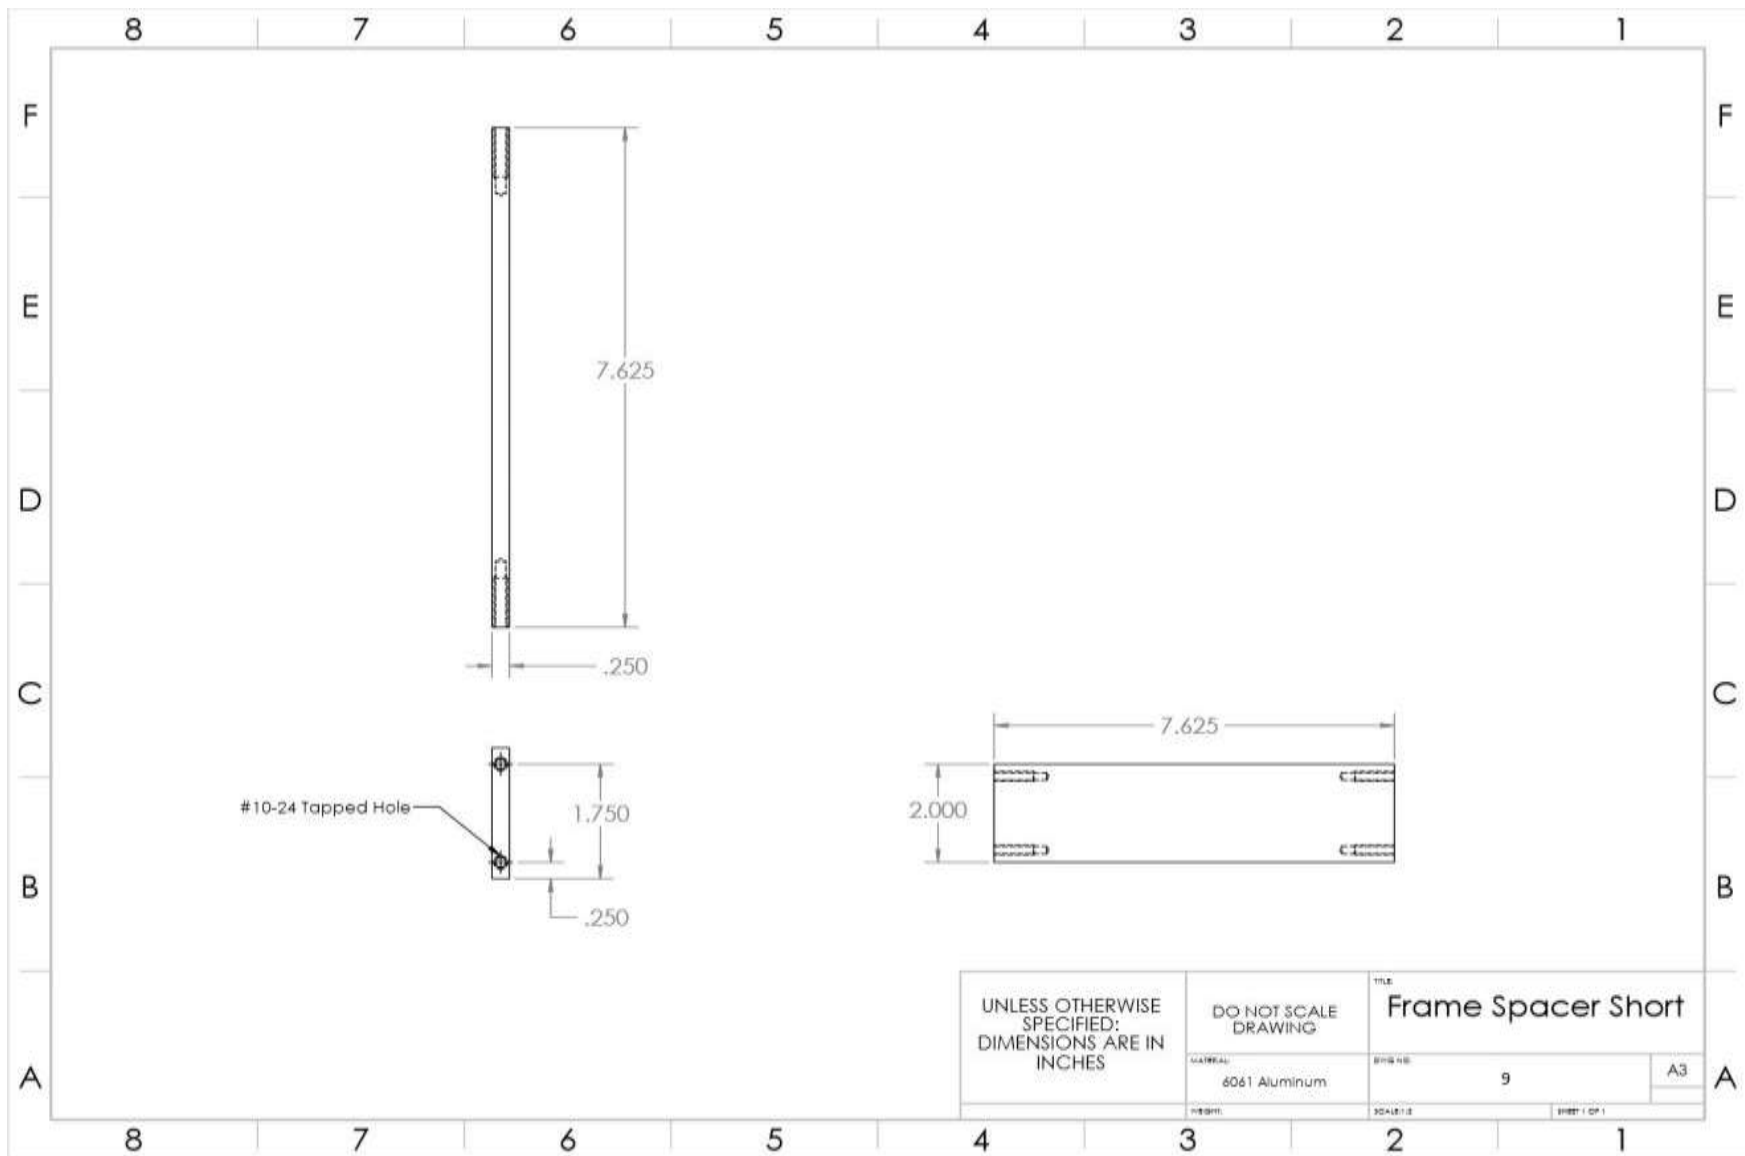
9. Mechanical Drawing of Frame Spacer Short.
